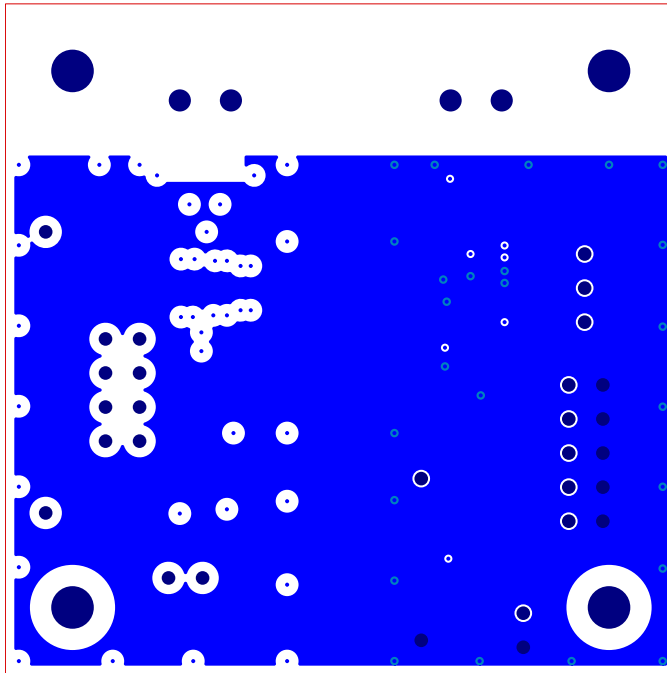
Internal 2 Layer of the SI86Pxxx Evaluation Board PCB
